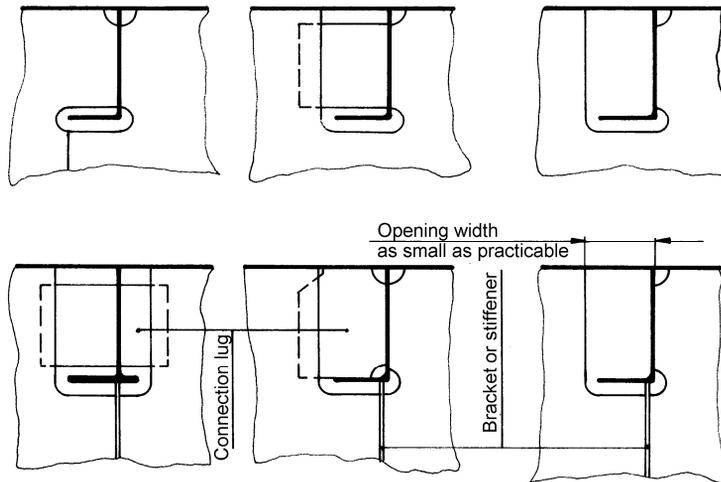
Connection of a stiffener to the web plate of a girder
